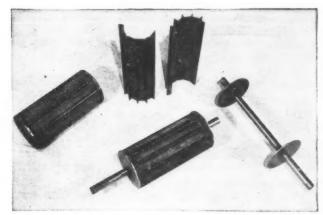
At left is former corrugated roll. New welded roll and shaft (center) are fabricated from steel shapes as shown.
